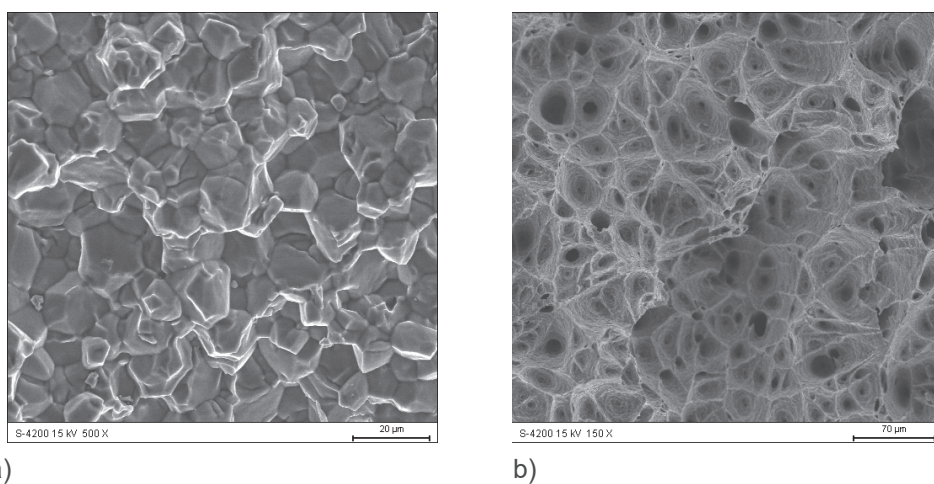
Fractography of sample fractures AZ61 alloy after tension of the samples at 505 °C (a) and 495 °C (b)
